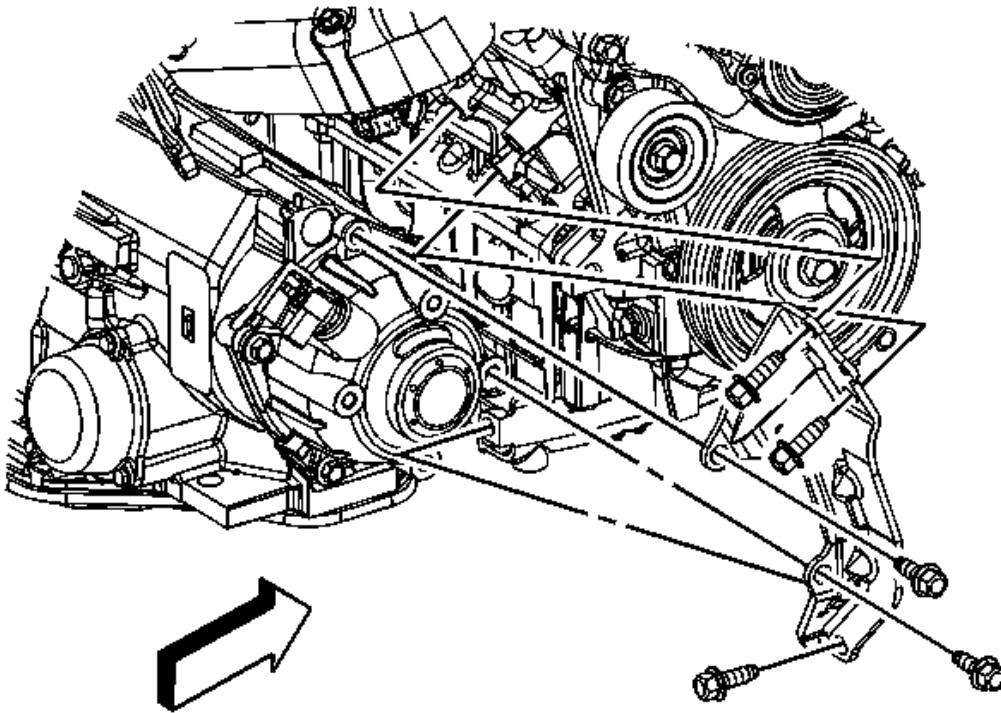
Locating Rear Transaxle Brace To Engine/Oil Pan Bolts
